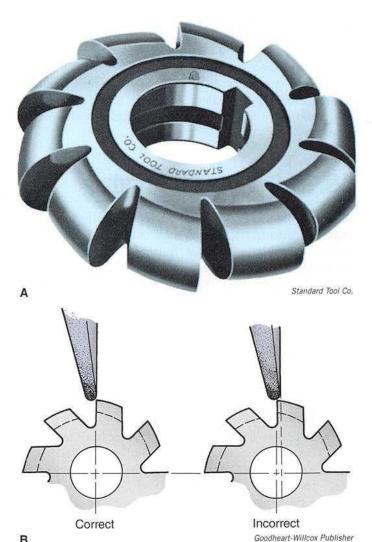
Form tooth cutters. A—This convex cutter is typical of form tooth cutters. B—Form tooth cutters must be ground radially. Otherwise, the form or shape that the cutter was designed to machine will be altered.
